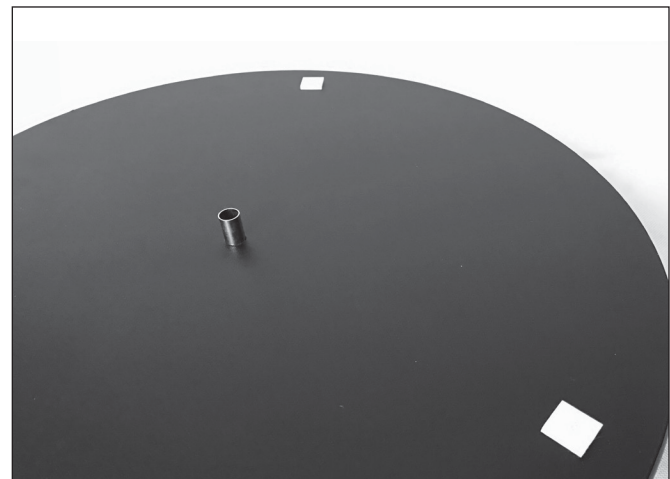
With the bottom groundplate standing on its three feet, insert the azimuth axle sleeve into the center hole of the groundplate.
